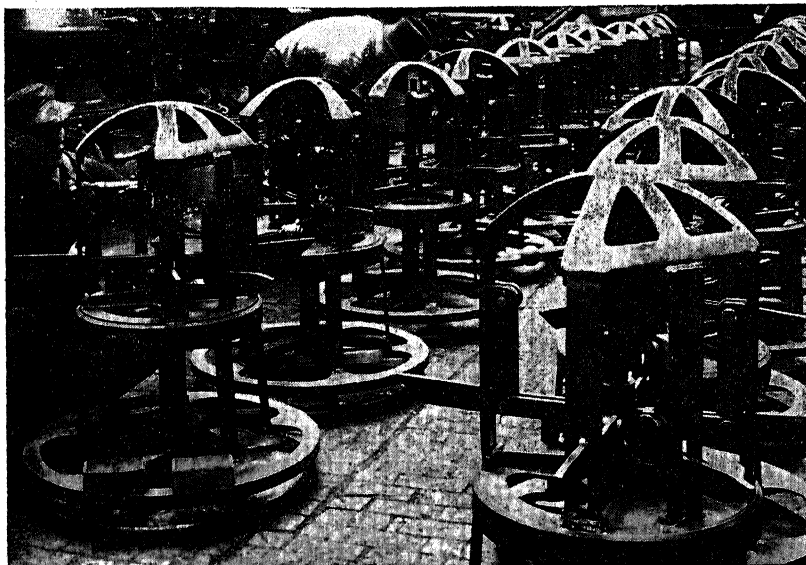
Wire reels of composite construction, employing both cast steel and welded steel parts.
